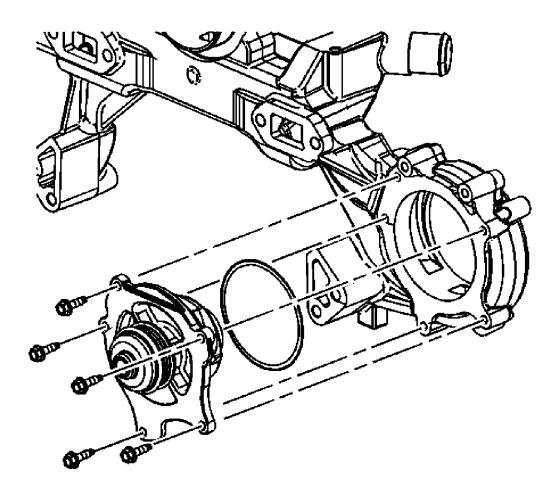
Removing/Installing Water Pump & Bolts Courtesy of GENERAL MOTORS CORP.
